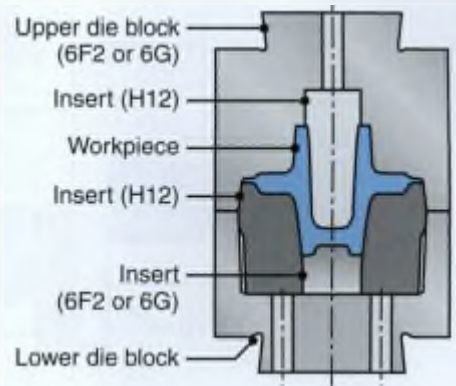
Die inserts used in forging an automotive axle housing. (See Section 5.7 for die materials.)
